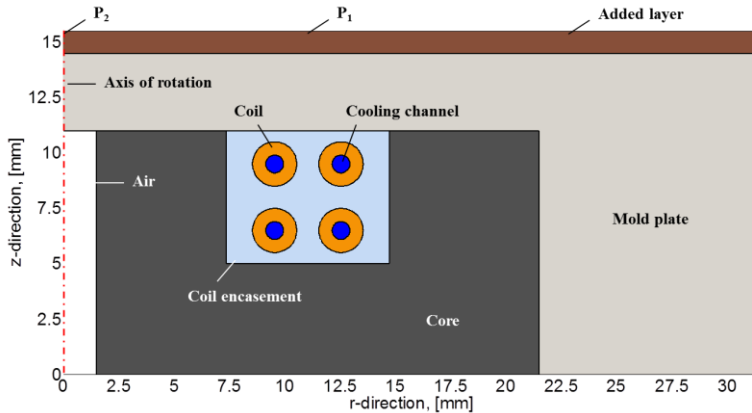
Detailed drawing of the sections in the axisymmetric numerical model
